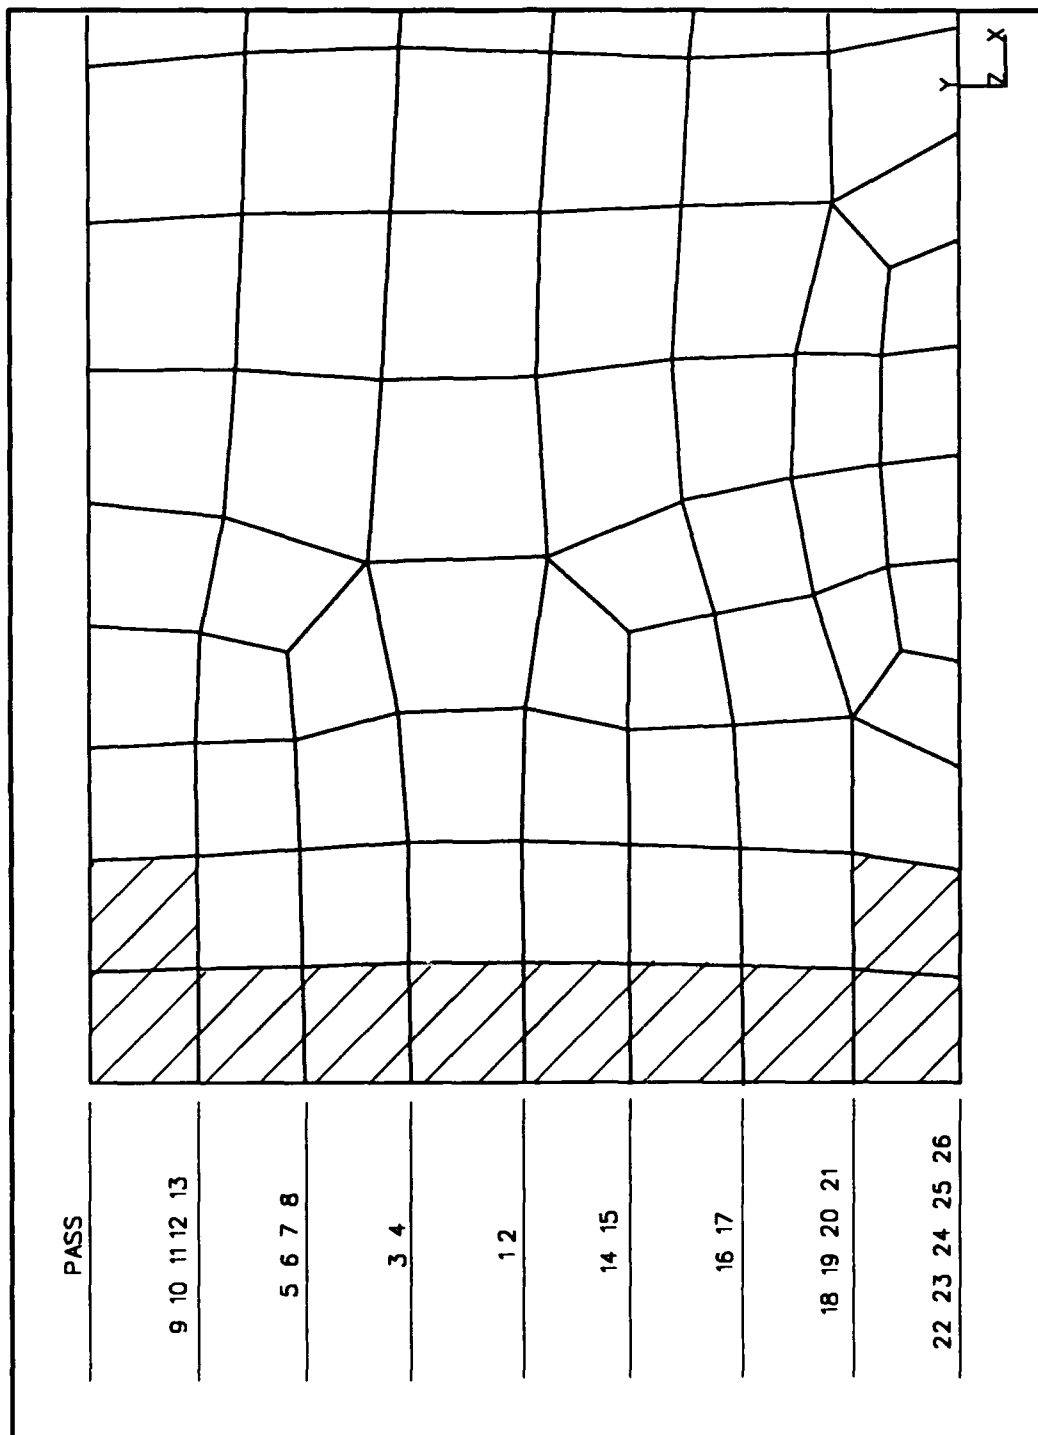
Lumped passes for flange weld (FACW: double-V-groove)
